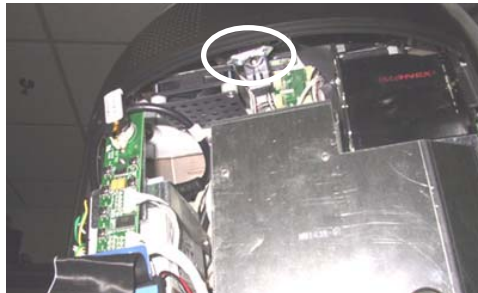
ROTARY DRAW LATCH INSIDE TOP COVER
